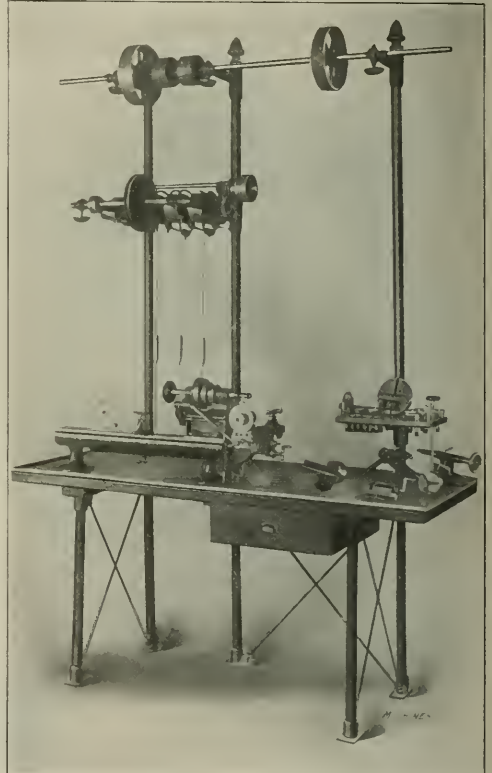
Hardinge Bros. Bench Lathe Milling Attachment.
